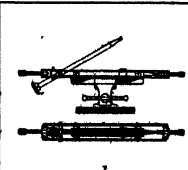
W. G. O'Brien's roller skate has a brake and foot spring only.
